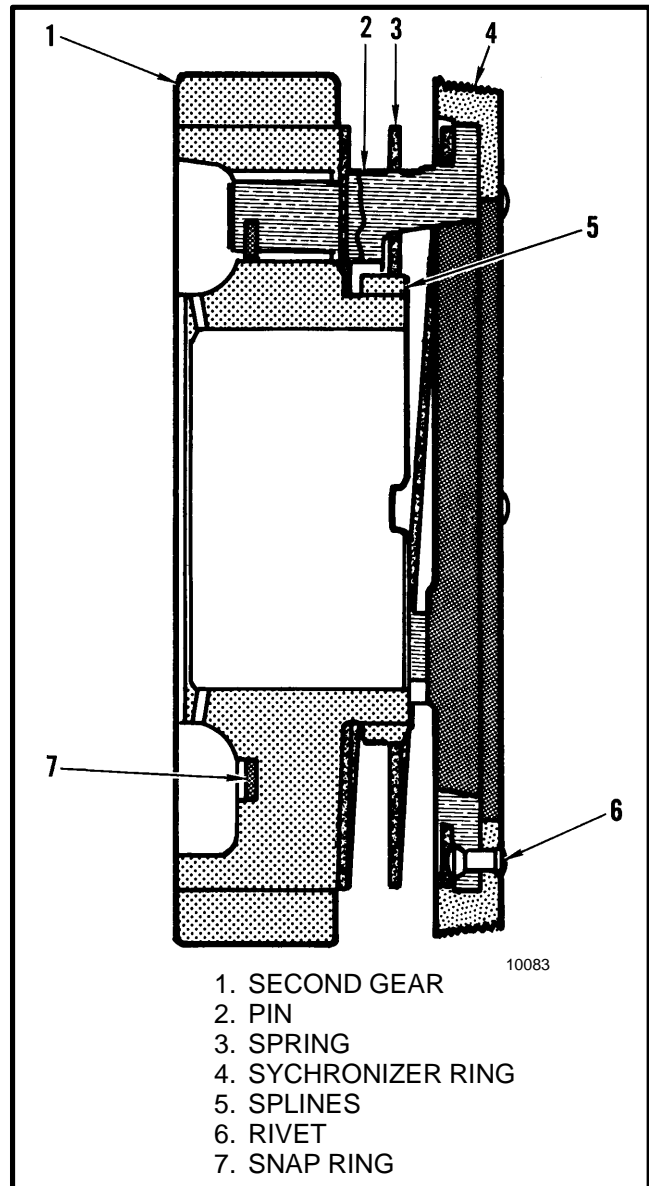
SYNCHRONIZER ASSEMBLY FOR SECOND GEAR
